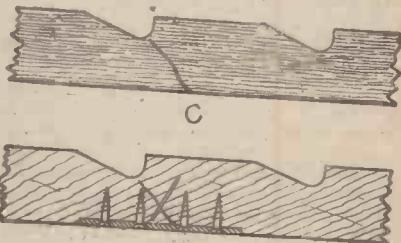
Using a repair plate to mend a fractured deck chair member.
